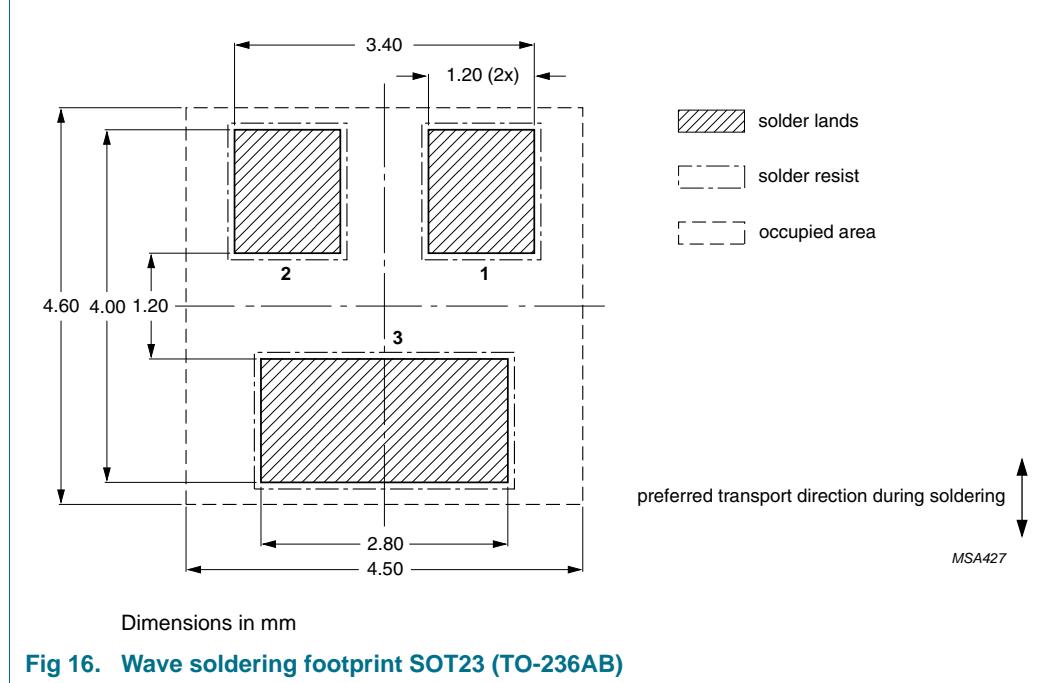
Wave soldering footprint SOT23 (TO-236AB)
